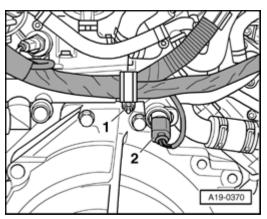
Removing Bolts & Loosening Hose Clamps And Removing Right Coolant Pipe From Coolant Hoses
